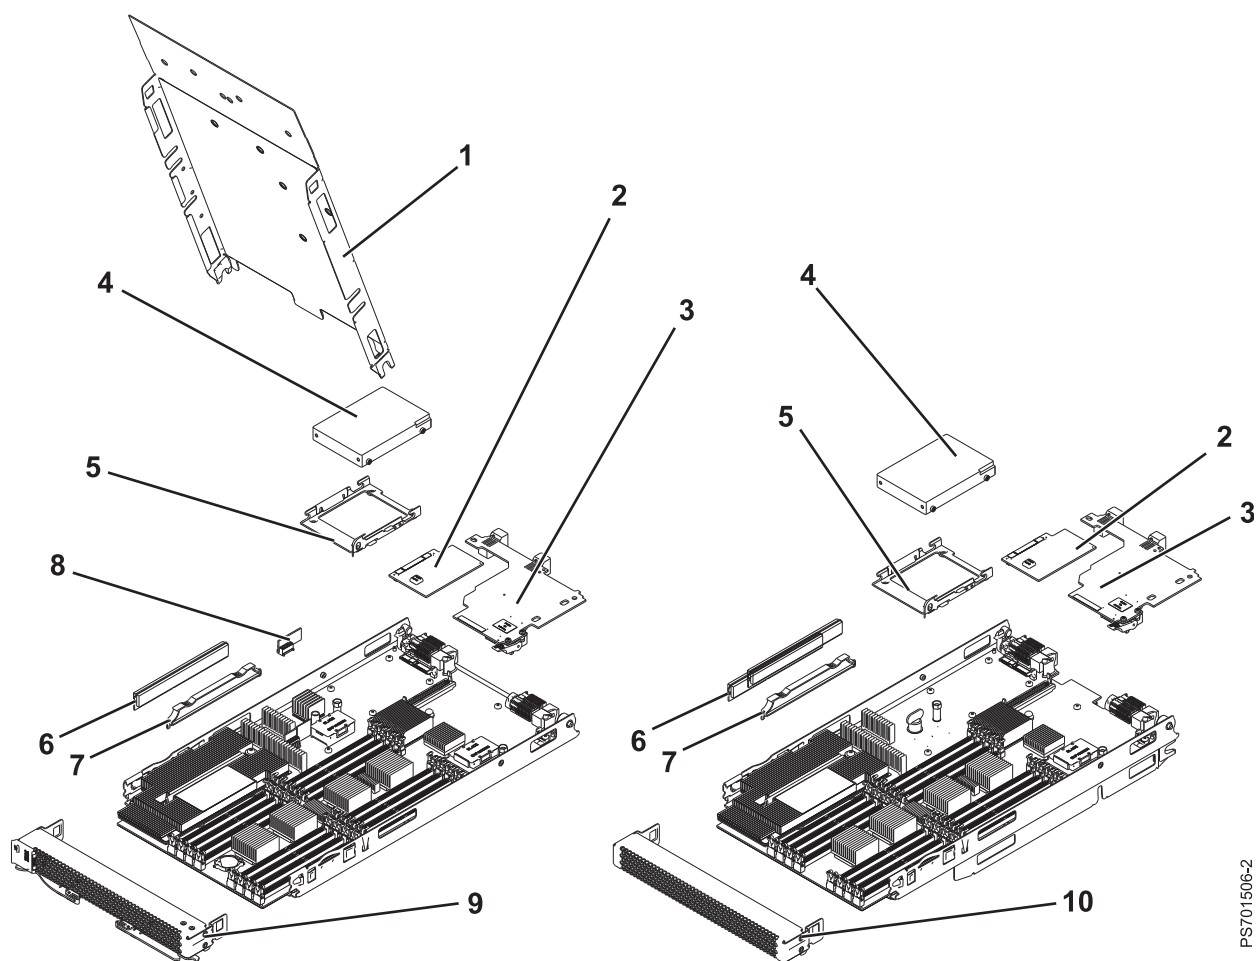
Parts illustration, Type 8406. PS701 and PS702 base unit with cover.
